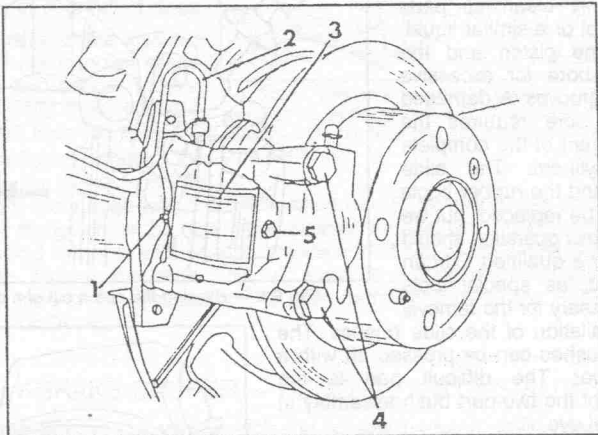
Details for the removal and installation of the rear brake pads.
